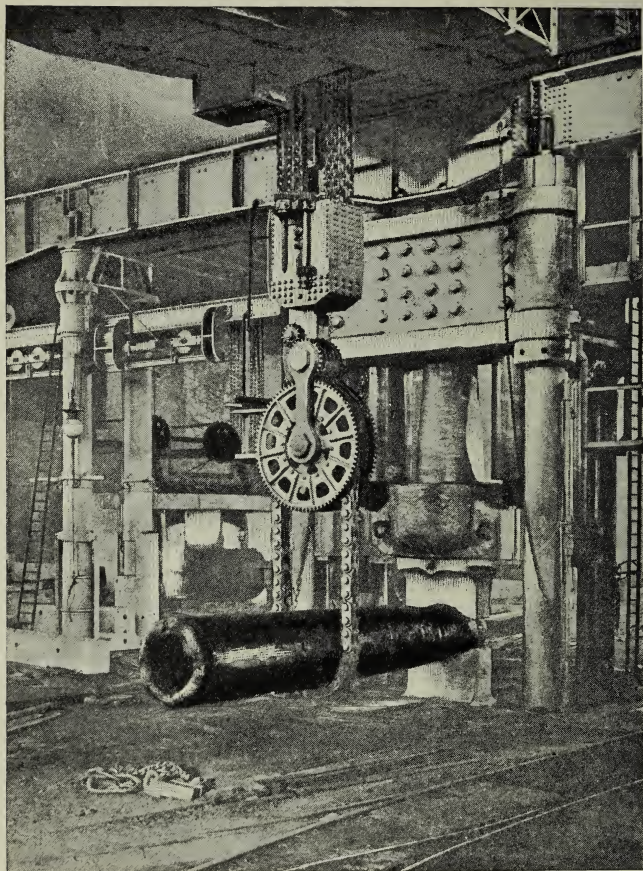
Forging a Gun Jacket in an 8,000-ton Hydraulic Press.
